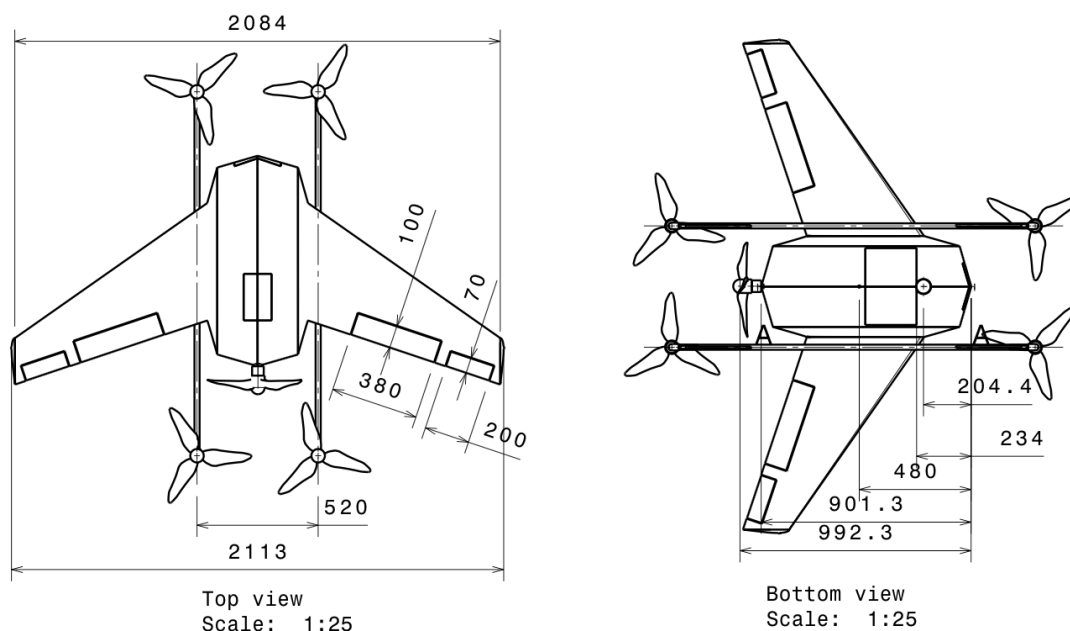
Technical drawing of the silent delivery drone including dimensions in millimetres
